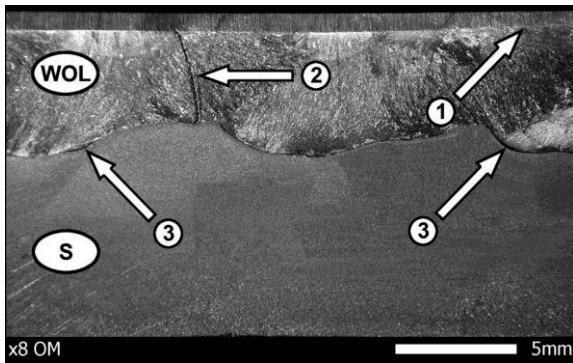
Macroscopic image of the EL-Hard 65 weld overlay layer. Grinding marks (1). In the padding weld are visible extensive macro-cracks (2) reaching the material of the substrate. Along the fusion line are visible discontinuities of weld penetration (3). WOL - weld overlay layer, S - substrate. Etched with Mi1Fe and electrolytically with chromic acid, OM
